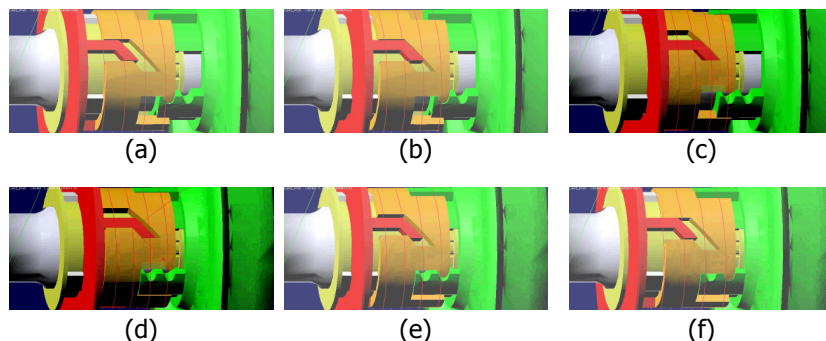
The changing process of the gauge-adjustable wheelset system when each axle passes through a special installation mounted between tracks of different gauges
